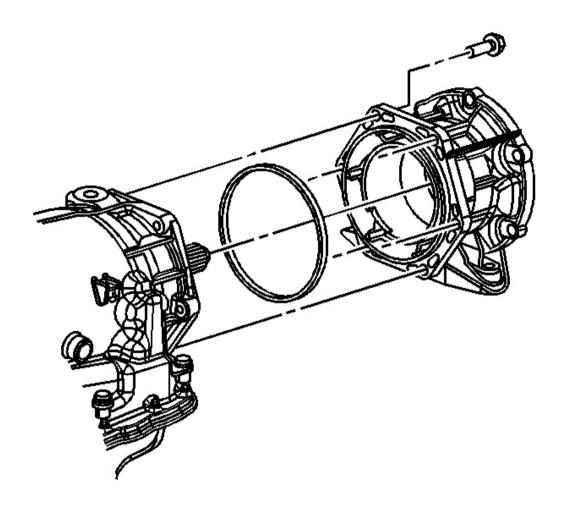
Transfer Case & Adapter Courtesy of GENERAL MOTORS CORP.
